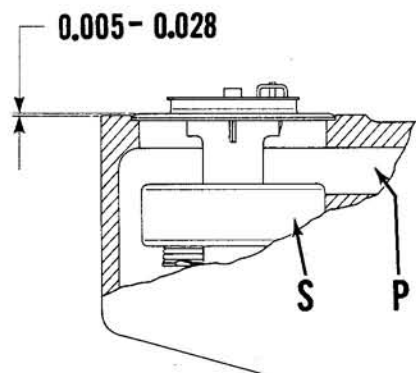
On all models, thermostat must protrude 0.005-0.028 from cylinder head as shown. Except on early "FMD," thermostat shroud (S) controls flow of water through by-pass passage (P) in cylinder head.
